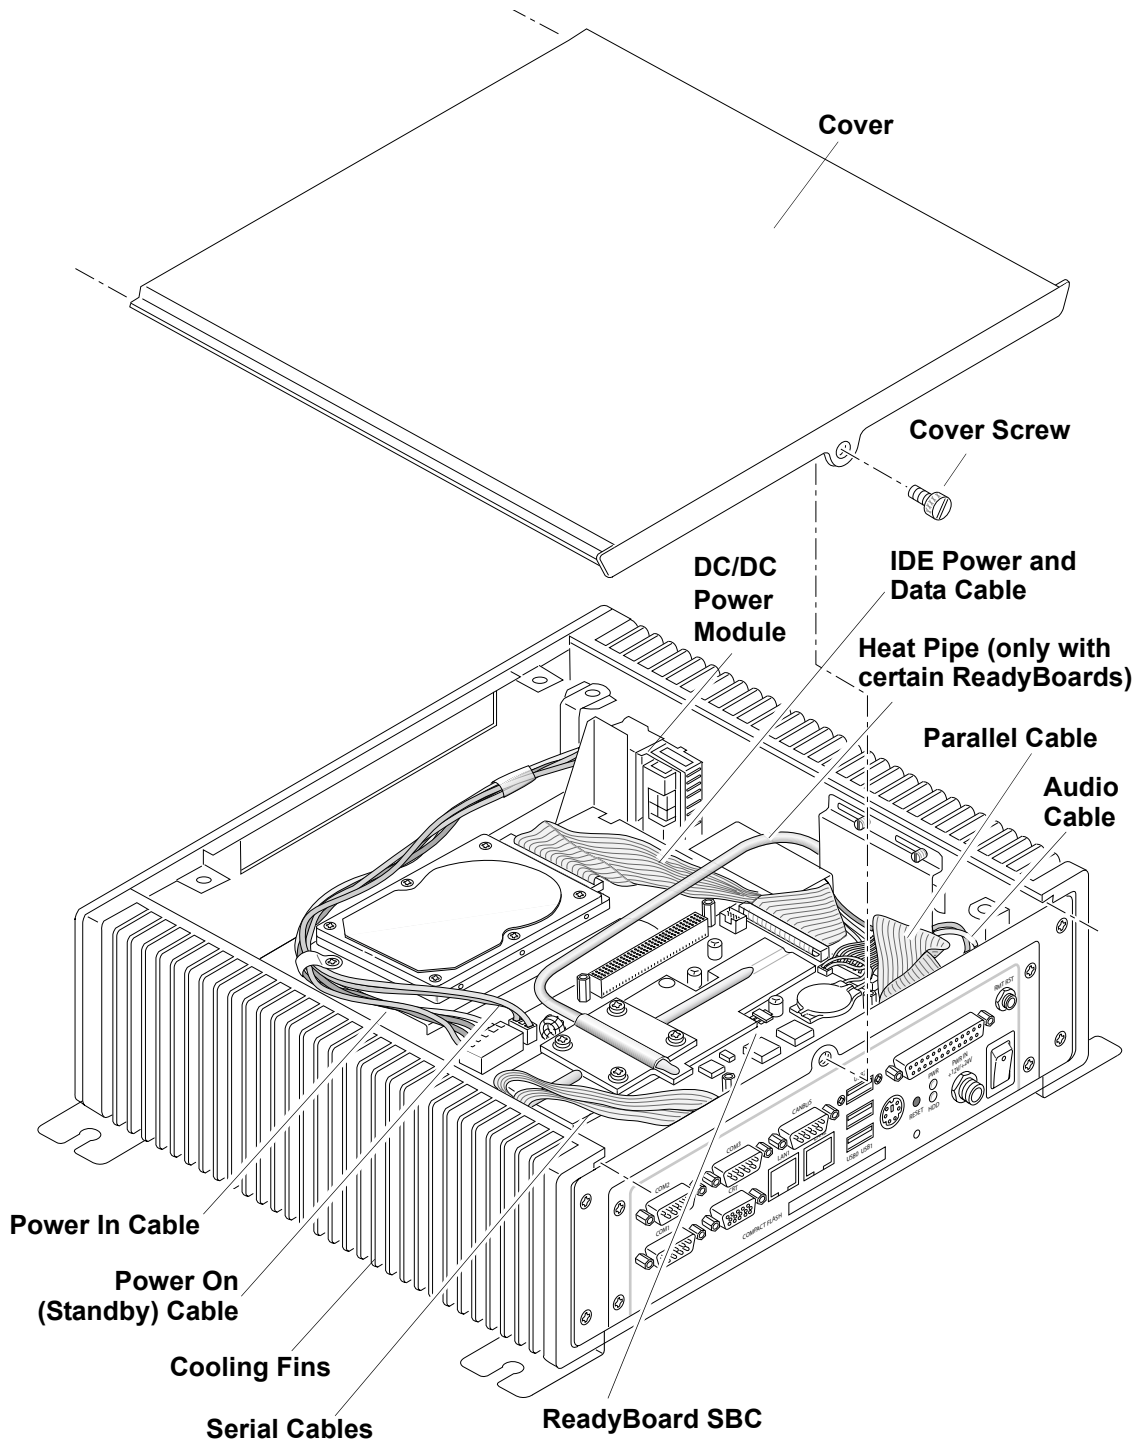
Exploded View of ReadySystem Fanless Assembly with Cover and Screws
